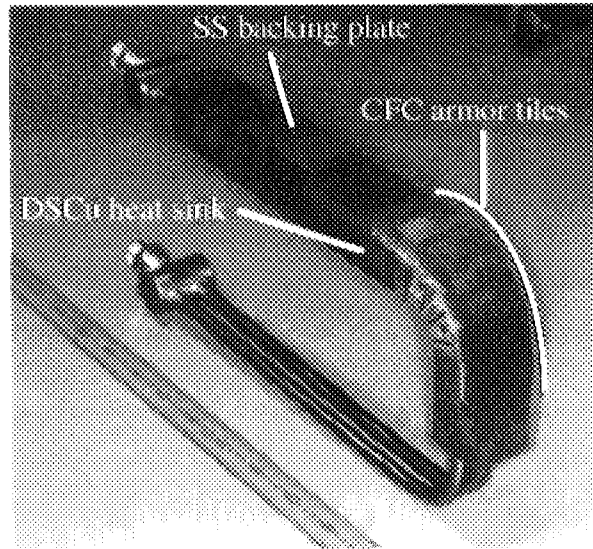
Fabricated small scale baffle first wall mock-up with CFC armor tiles
